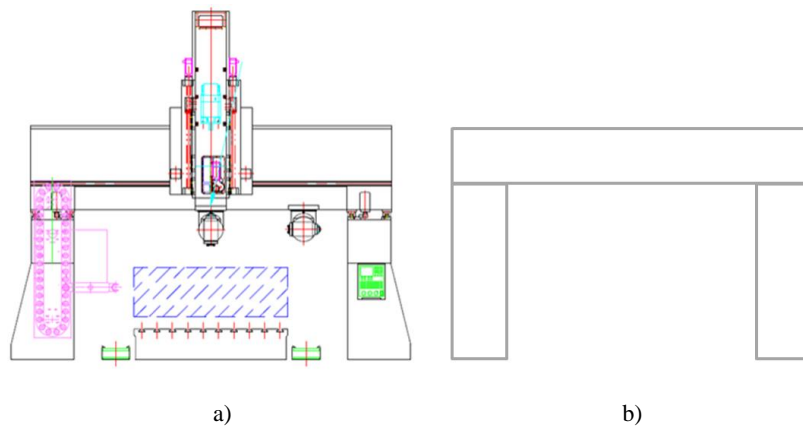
a) Real machine tool considered as reference, b) Simplification of the real machine tool.
